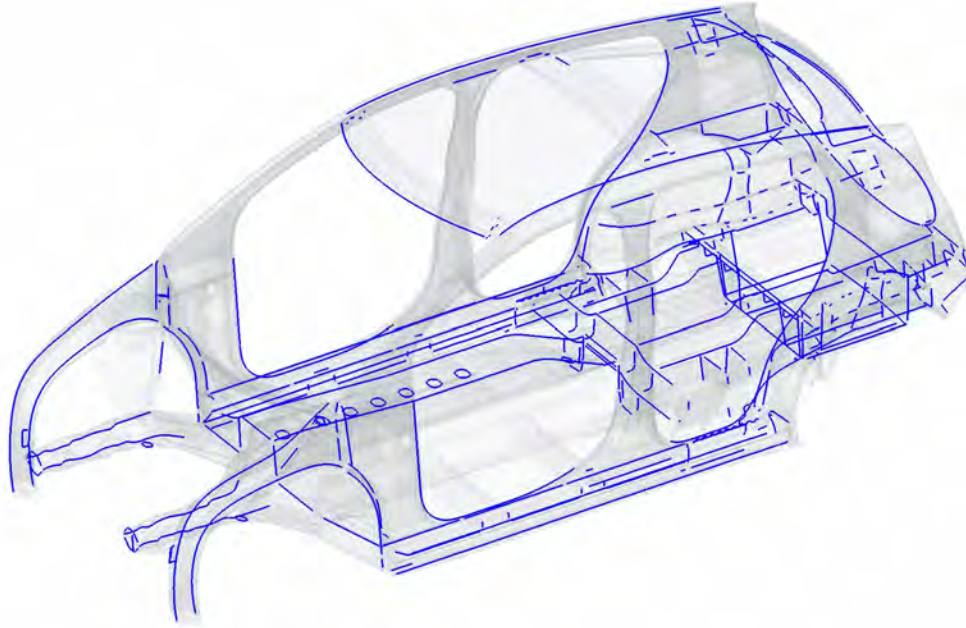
FSV laser welding (continuous pattern)
